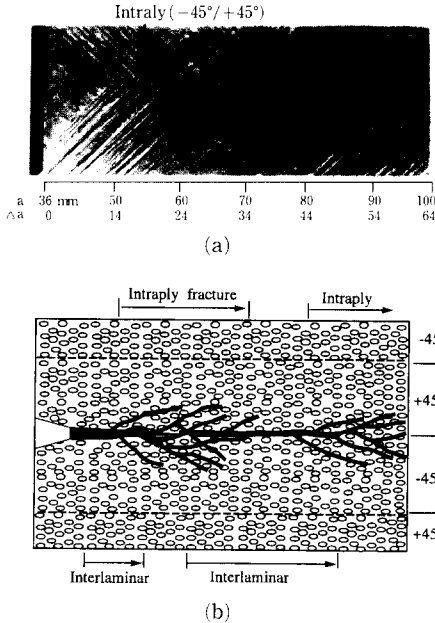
Fracture surface photograph for the specimen of Fig. 13.
